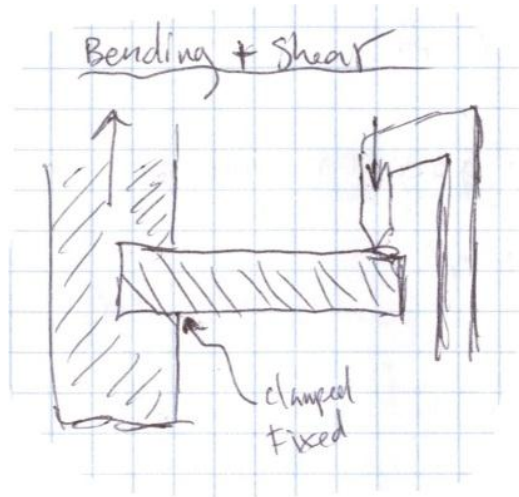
Sketch of initial concept for bending and shear combined loading fixture
